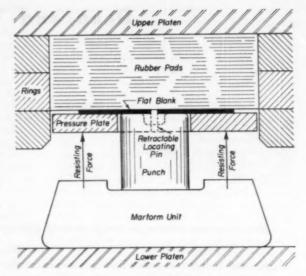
Tooling in Single-Acting Hydraulic Press for Making a Flanged Cup. Position shown is after blank has been placed on top of punch and pressure plate, and upper platen lowered to where rubber blankets are in contact with work. The beginning of the forming stroke
